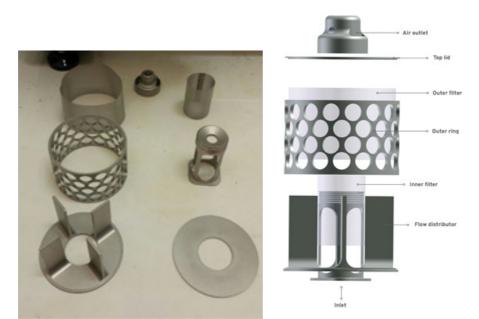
and Figure 2.24 The seven piece which compose the SpinChem® RBR S221 and the scheme to assemble it
